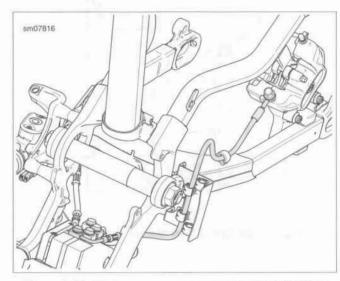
EHCU to Caliper Rear Brake Line Routing
